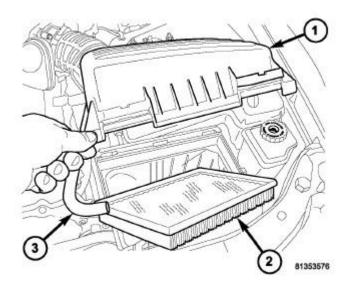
Air Cleaner Element Courtesy of CHRYSLER LLC
